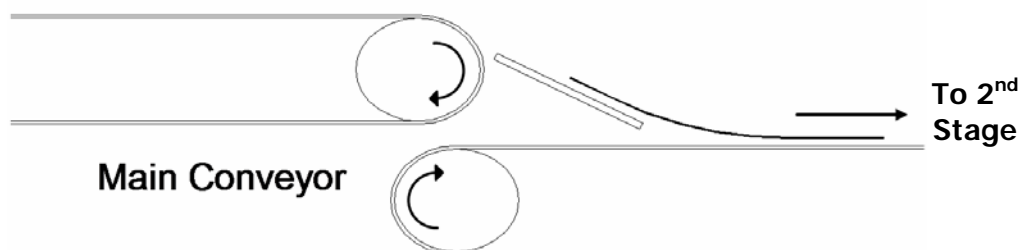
Front View Showing Inner Leadframe Moving Along the Main Conveyor
